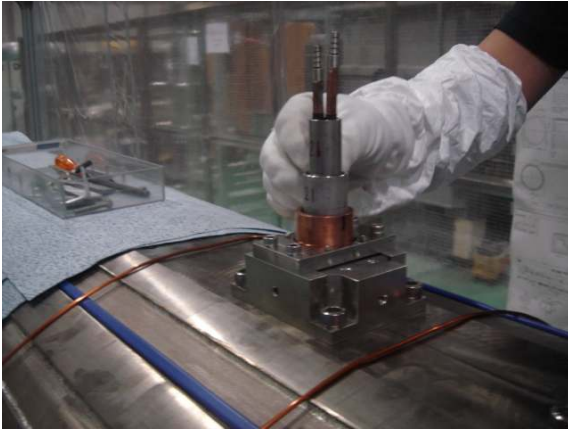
Drift tubes are fixed on the DTL tank by adjusting mechanism.
